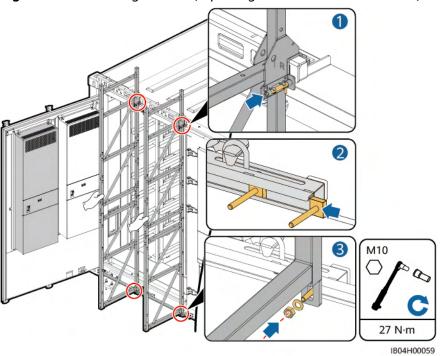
Installing trusses (replacing the outer air conditioner)
